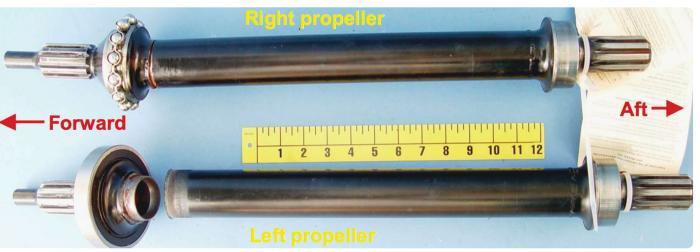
The two fractured propeller shafts, as received. The left side shaft had completely fractured at the forward weld, while the right side shaft was fractured but still attached in the same location.
